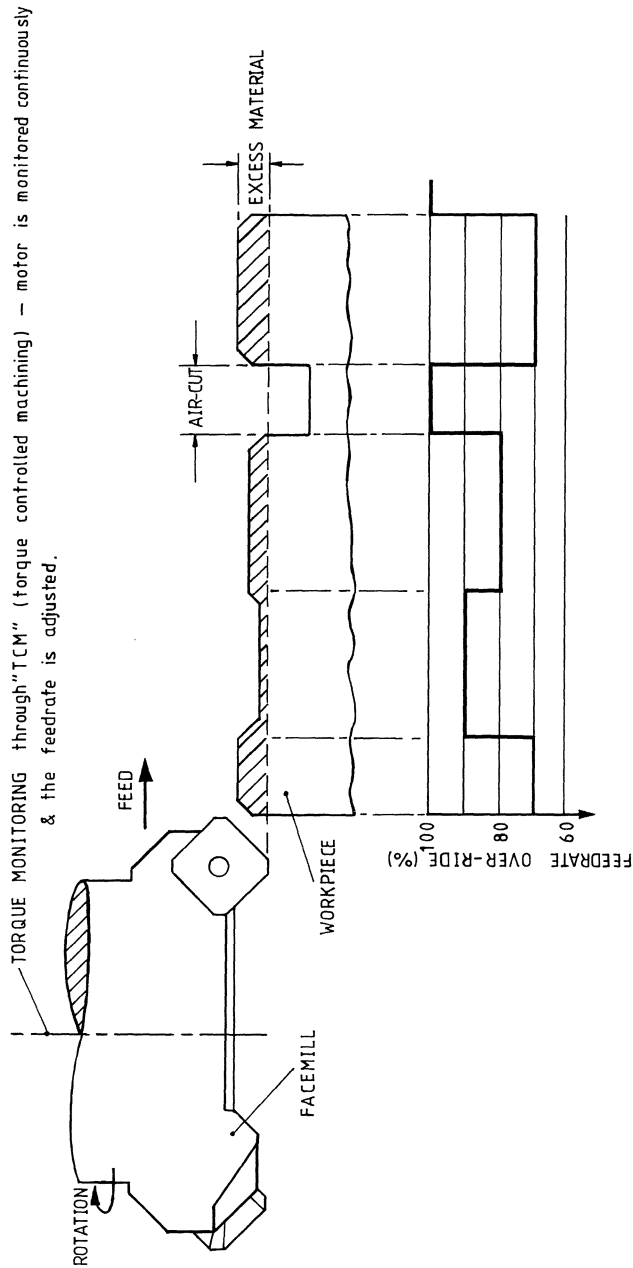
Advantages of adaptive control when milling: optimised feedrates avoid tool damage; extended tool life; higher production rates; reduced intervention by operator; faster set-up times; reduced tool breakage.
